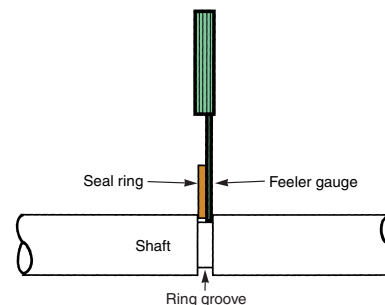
Seal rings and grooves are vital to proper operation of the transmission or transaxle hydraulic system. They should be carefully checked to ensure that they can do a good job of sealing. Using a feeler gauge as shown here, the maximum end clearance of a new seal ring in its groove should be about 0.003"–0.006" (0.07mm–0.14mm).
